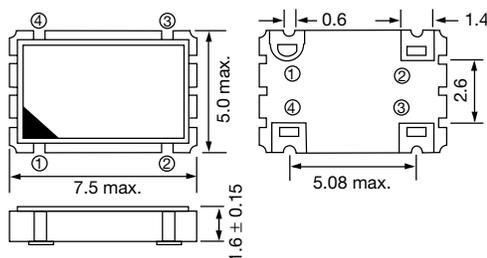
ECS-3951M/3953M Top, Side and Bottom views
